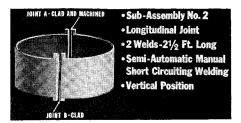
Sub-assembly 2 used in welding 6000 lb titanium 721 alloy cylinder.
